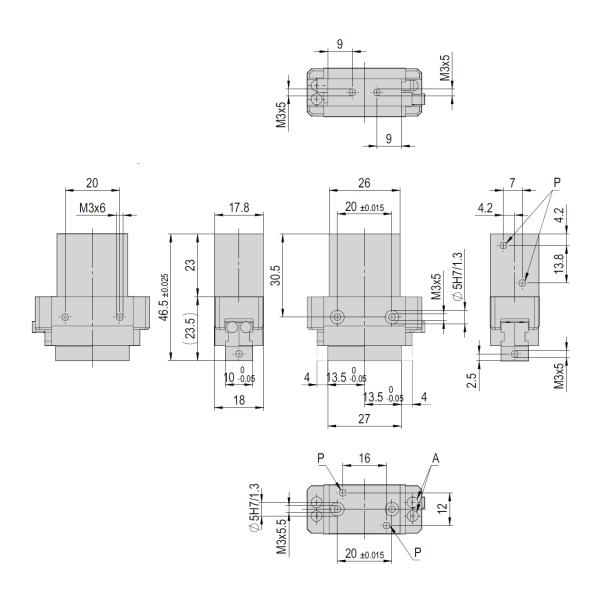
Dimensional drawing of precision gripper PG 16 NC & PG 16 NO
